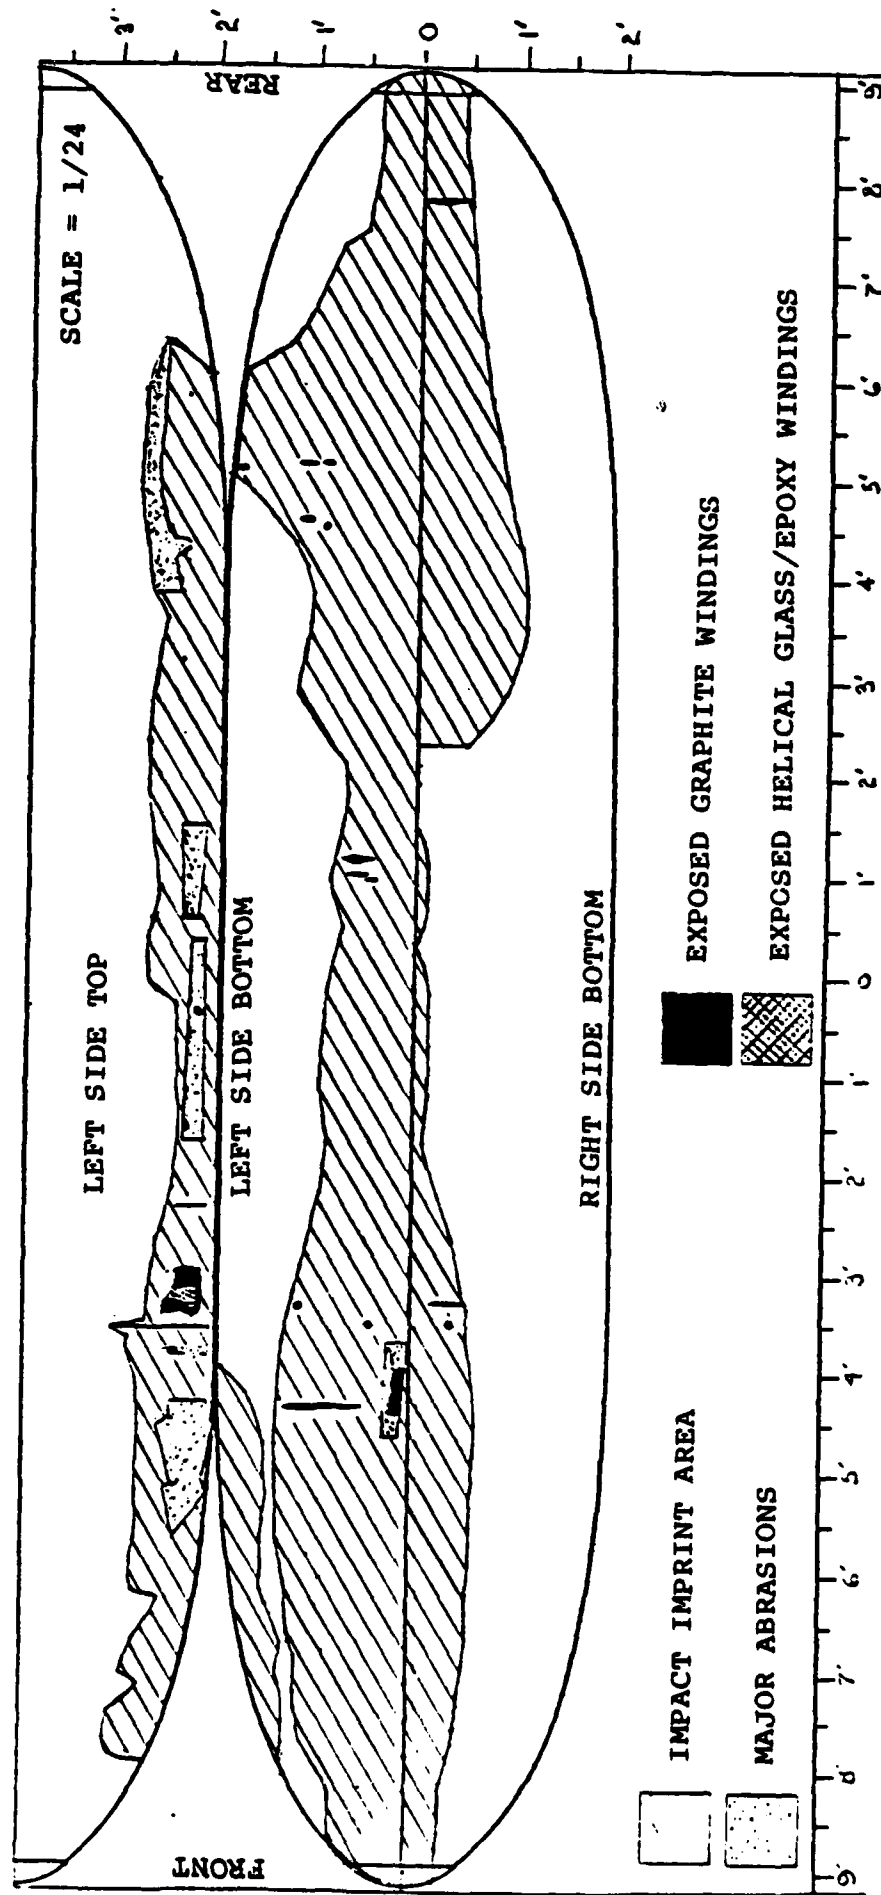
FUEL TANK SN0003 IMPACT IMPRINT SKETCH.
